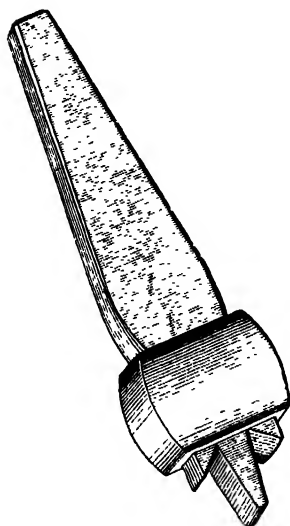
IMPROVED CROTCH PUNCH FOR SETTING SAWS.
